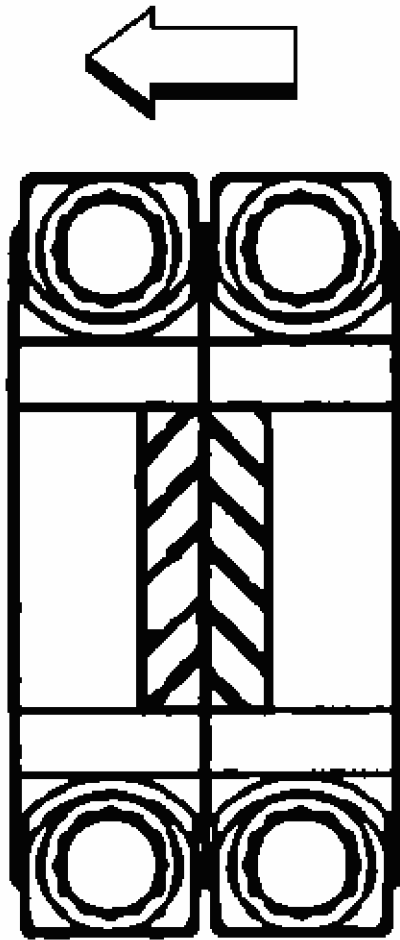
View Of Paired Connecting Rod Bearing Cap Notches
